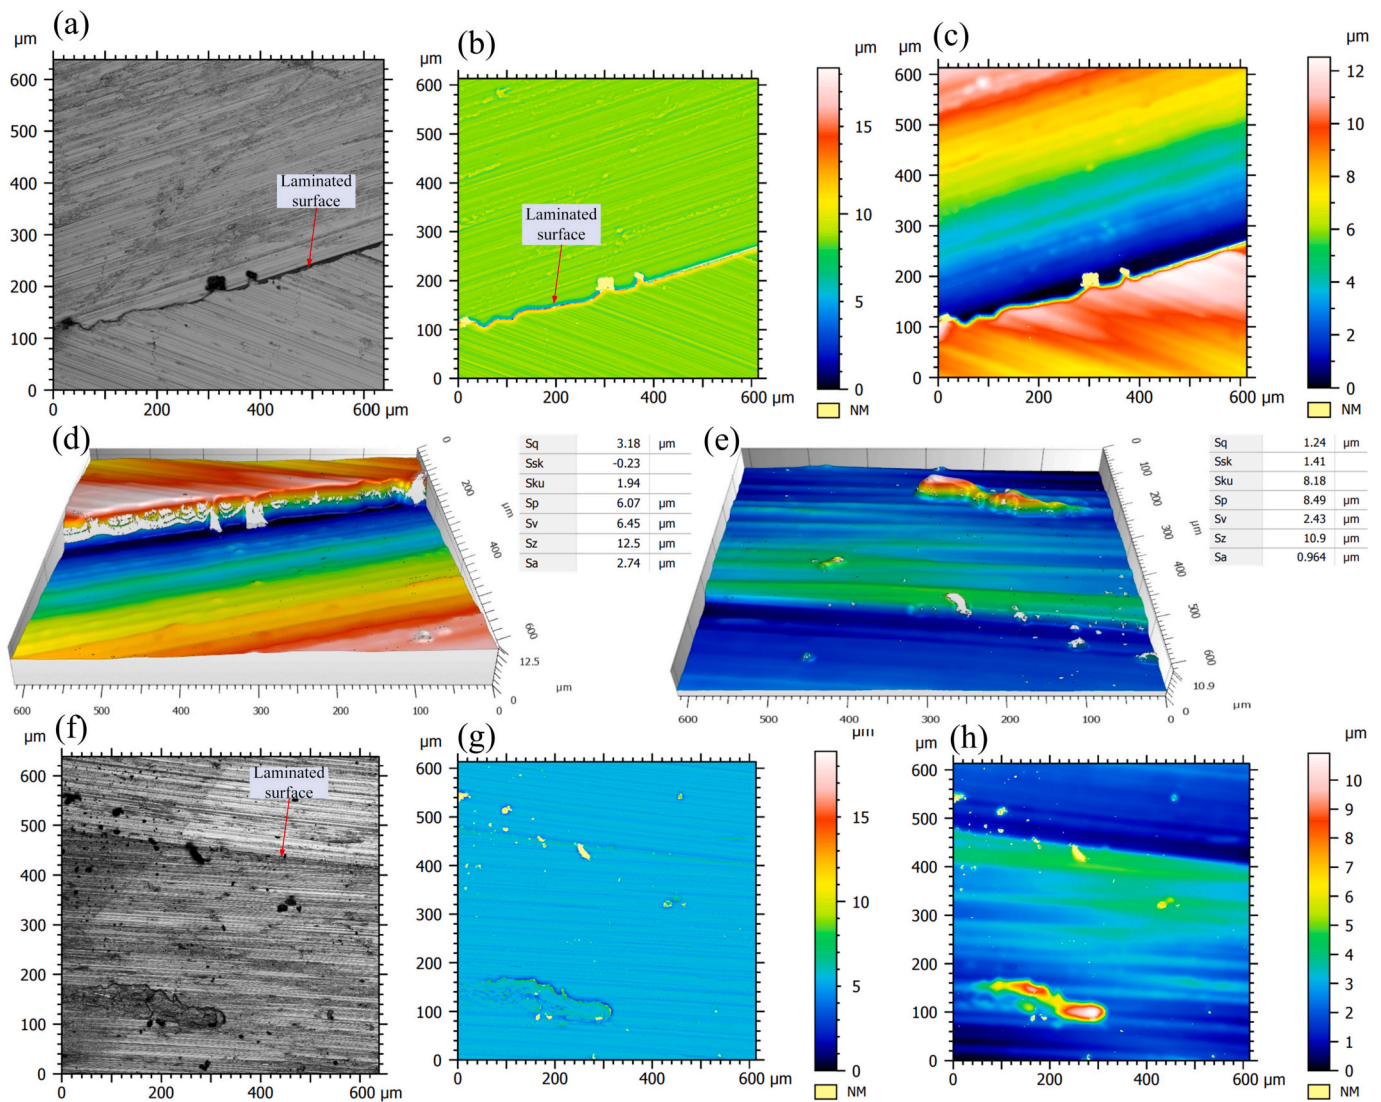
Scanning photographs of machined surfaces with (a)-(d) carbide and (e)-(h) PCD circular saw blades (the 10th sawing).
